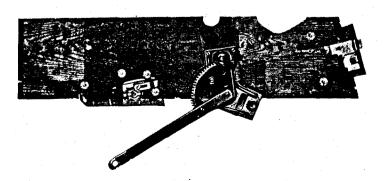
Illustration No. 78 Front Door Window Regulator Board and Mechanism.
